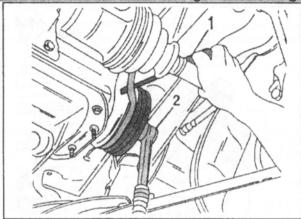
Insert a screwdriver (1) as shown and rotate the crankshaft with a socket (2) until the water pump drive belt is free.
